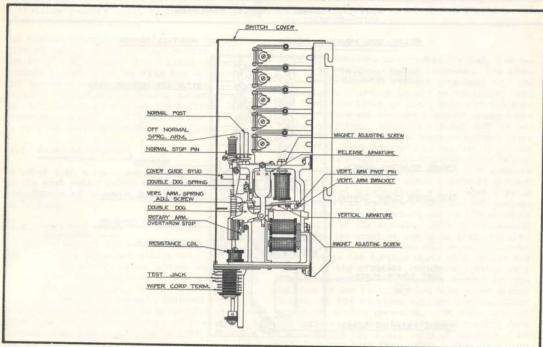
CONNECTOR SWITCH, RIGHT VIEW
